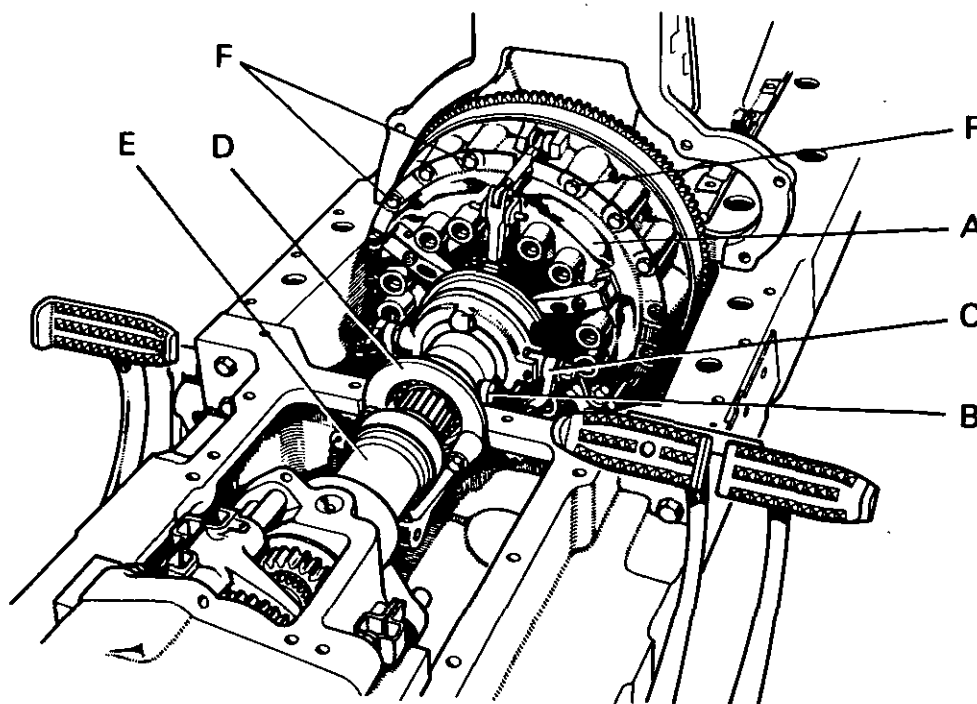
TRACTOR WITH GEARBOX COVER REMOVED
